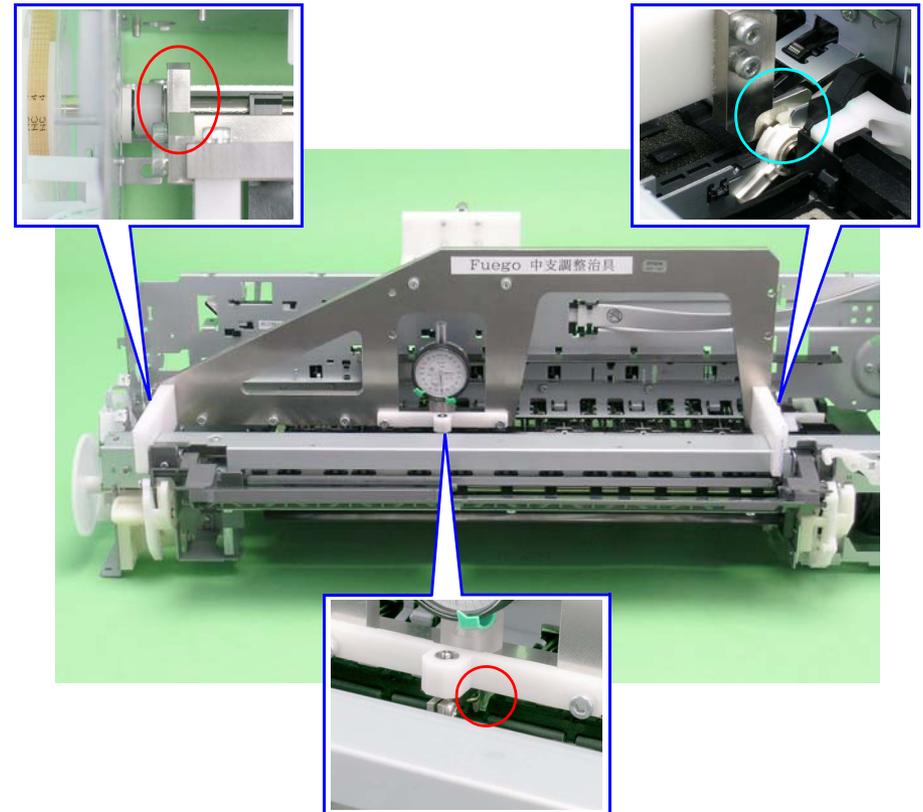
Setting the PF Roller Shaft Position Adjustment Jig
